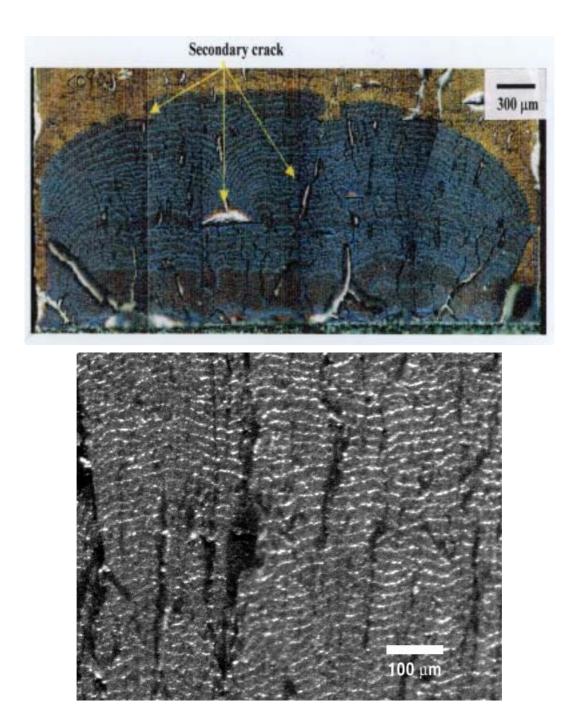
Striation lines observed on the fractured surfaces of the Zr-2.5Nb tube after the DHC test.
